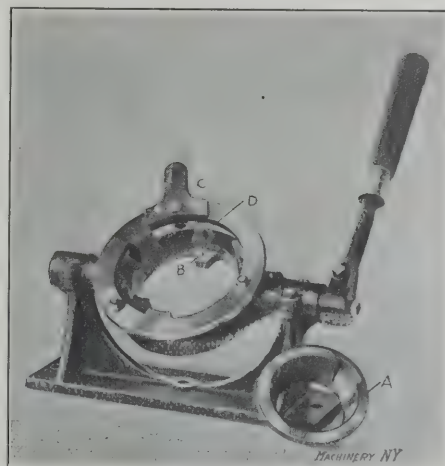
Fixture of which the Casting shown in Fig. 1 forms a Part
